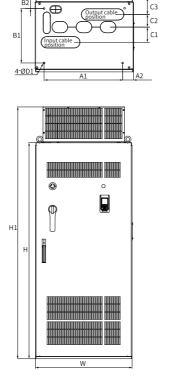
Outline dimensions and mounting dimensions of T13 models (without auxiliary power distribution cabinet)
